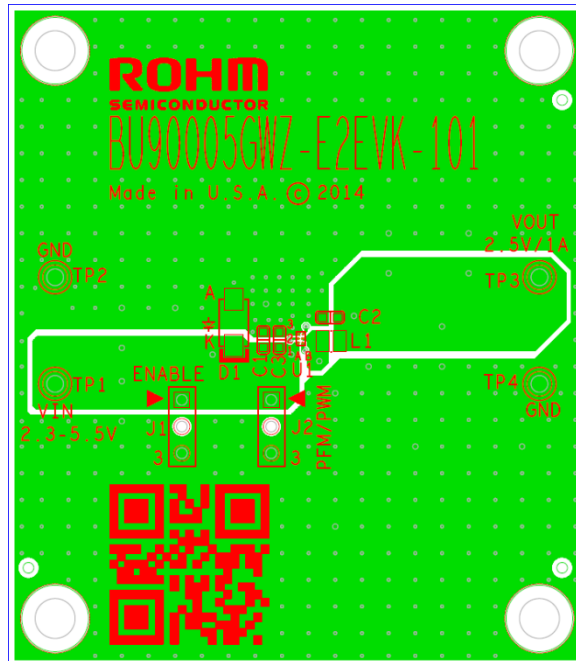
BU90005GWZ-E2EVK-101 Board PCB layout
